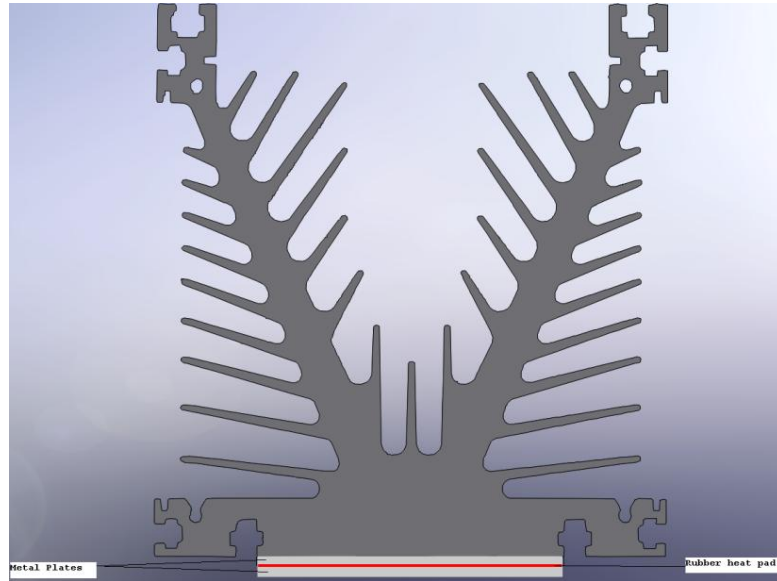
Testing Orientation with Heater Pad Location, Front View
